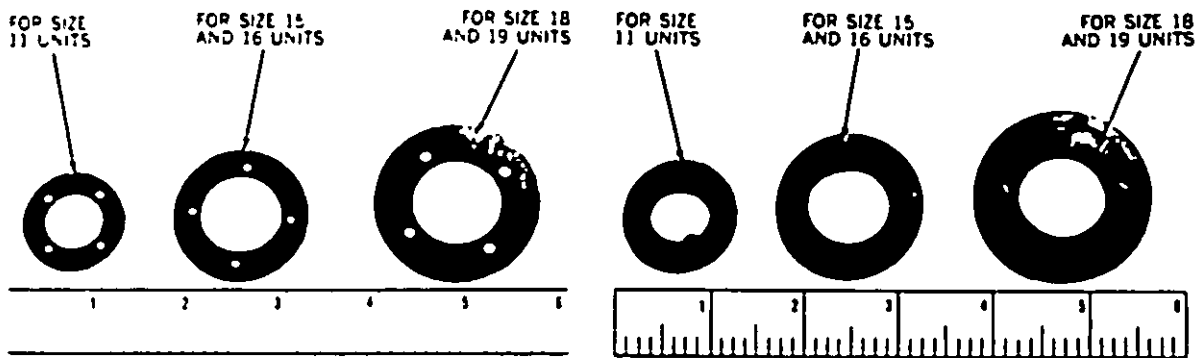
Clamping discs - MS90400. FIGURE 96. Adapter assemblies - MS90401.
